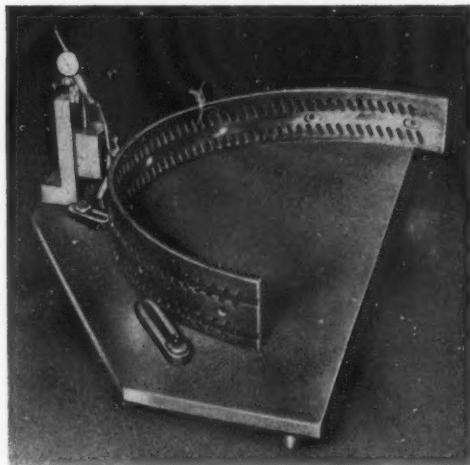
Special-purpose Dial Gauge Angle Comparator, for Checking Blade Attachment Slots in Magnesium-alloy Stator Rings. The Instrument Reads Directly to 1 min.
